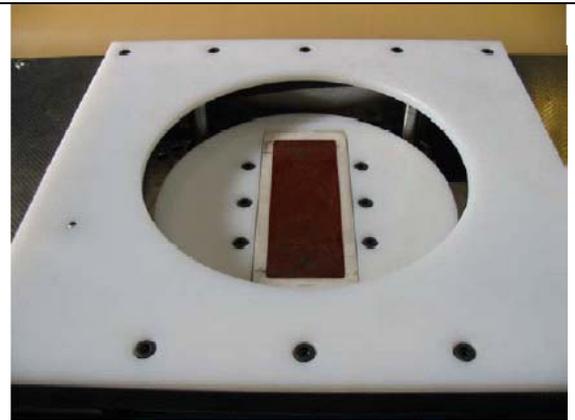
Top view of the 3MA transducer build in the roller table carrier
